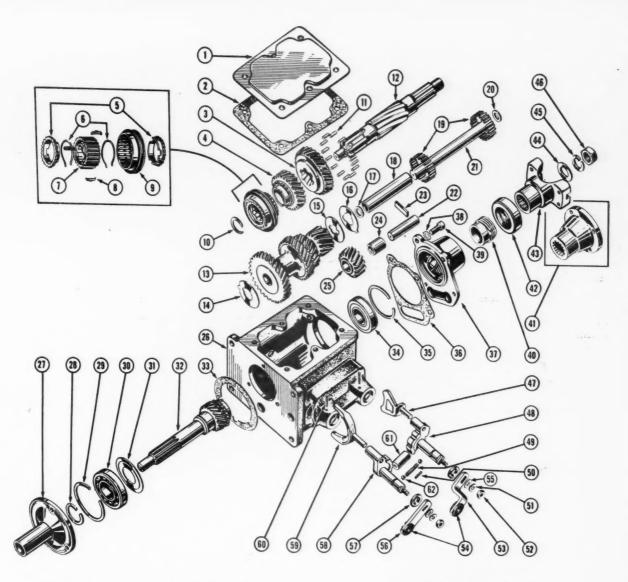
Exploded view of the shifting mechanism, showing the shift levers and related parts.
